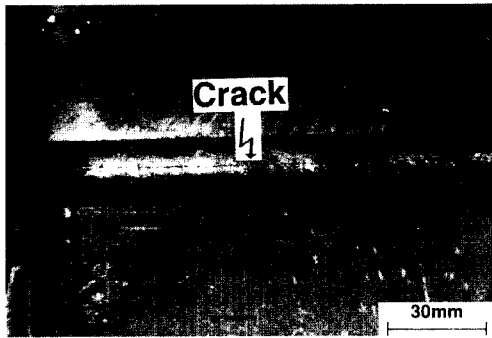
An example of longitudinal crack formed on the face of weld
